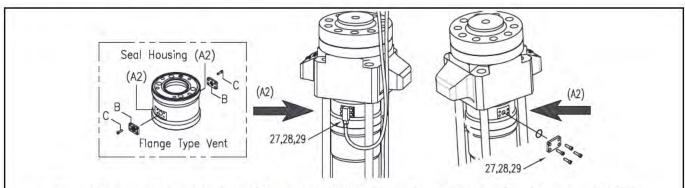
Remove Flange Vents at (A2). Install 4-Bolt Flange UW Adapter & 4-Bolt Blind Flange Plate
